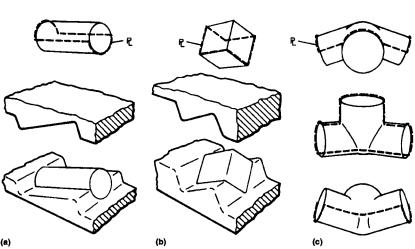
Selection of parting lines to eliminate draft in (a) cylindrical, (b) square, and (c) tube-shaped forgings
